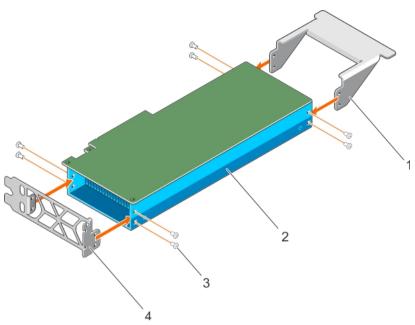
Installing the Intel GPU I/O brackets and the support brackets
